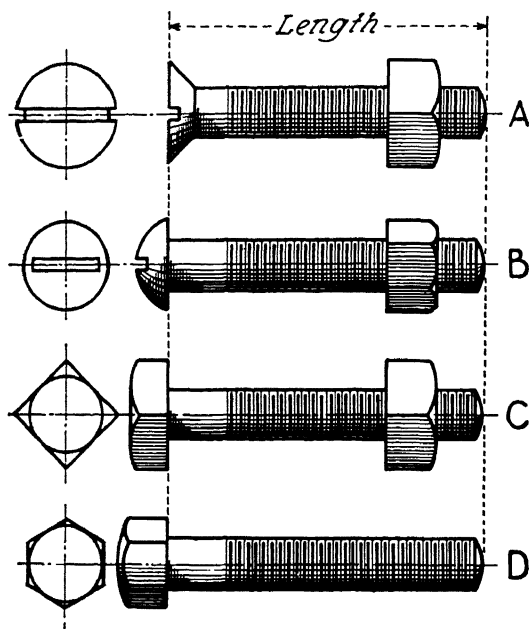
A, flat-headed machine screw with square nut; B, round-headed machine screw with hexagon nut; C, machine bolt with square head and square nut; D, hexagon cap screw
